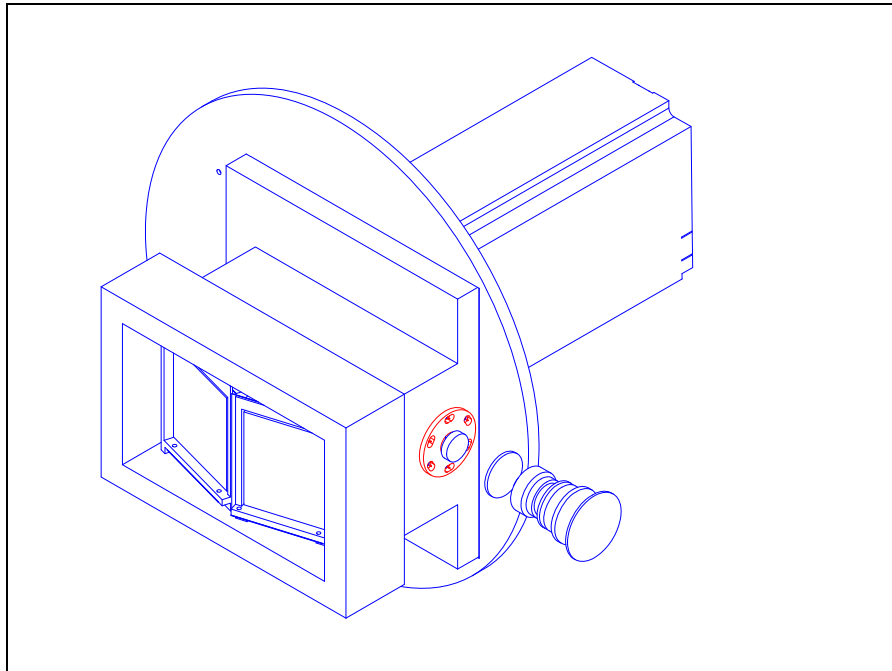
drawing showing assembled spectrometer mated to camera. The end cover is removed so that the spherical mirrors can be seen inside the spectrometer. The lens assembly, which is on the right side of the drawing, is shown without a mechanical barrel.
